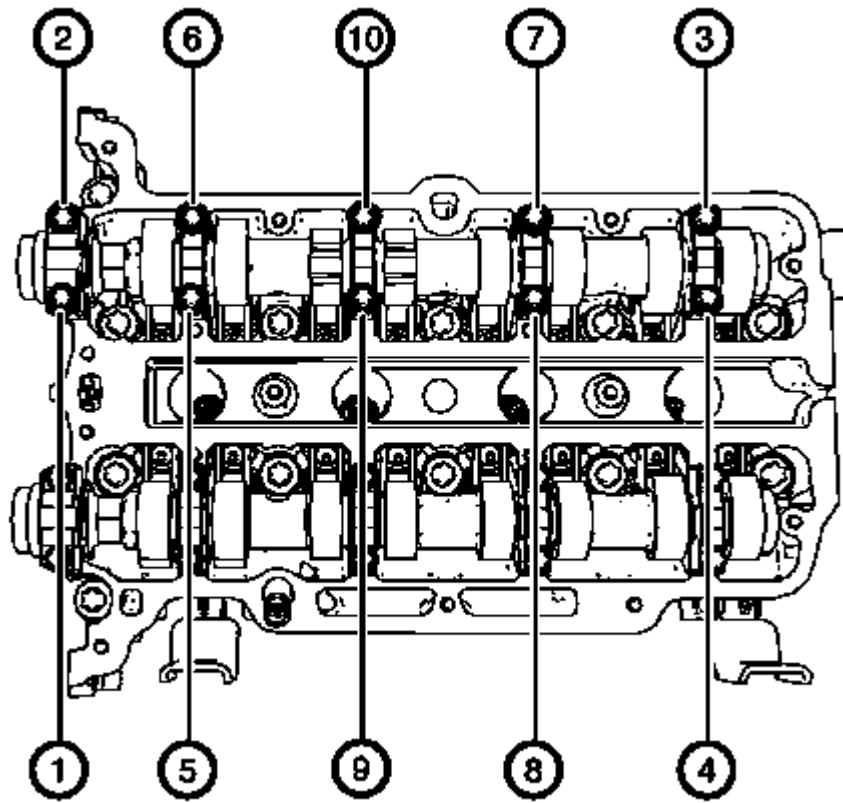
Intake Camshaft Bearing Cap Bolts Removal Sequence
